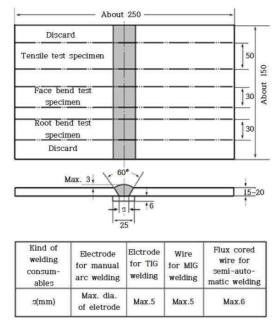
Butt Weld Test Assembly for Stainless Steel(Except for Submerged arc welding, Unit: mm)
